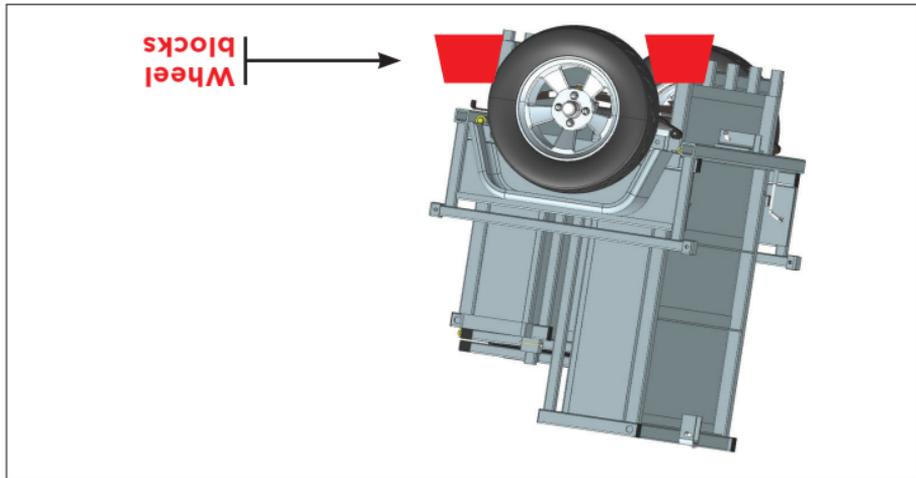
Please ensure the trailer cannot move by unintentionally (for example, by using wheel blocks) at the front and at the back of the wheels.
